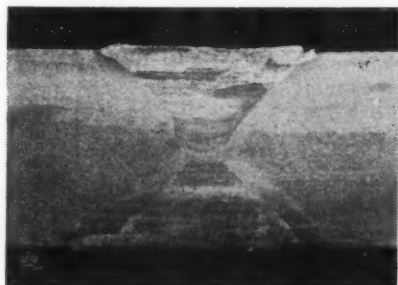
Welded joint in which proper steel specifications and welding technique have been observed
